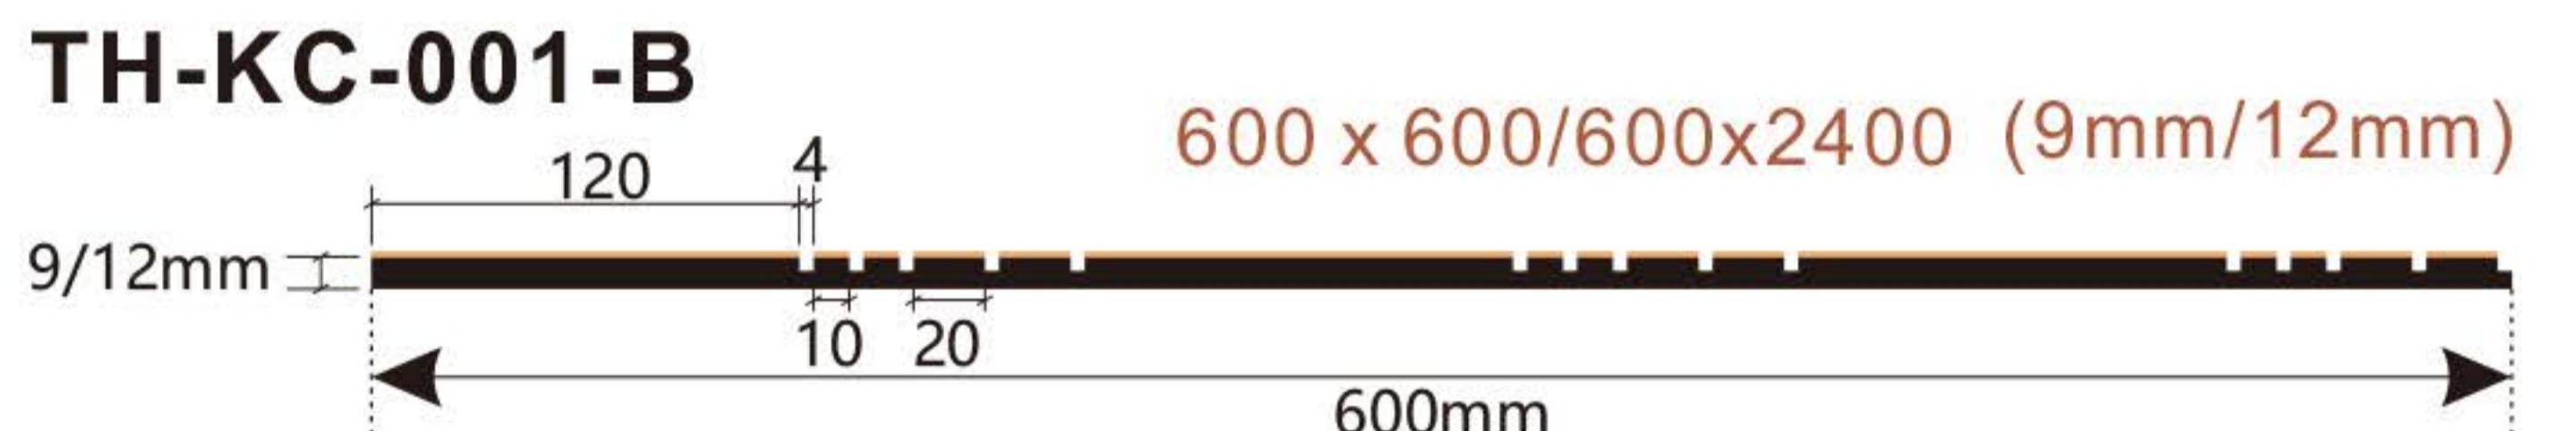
DETAILED DRAWINGS OF PRODUCT DIMENSIONS
